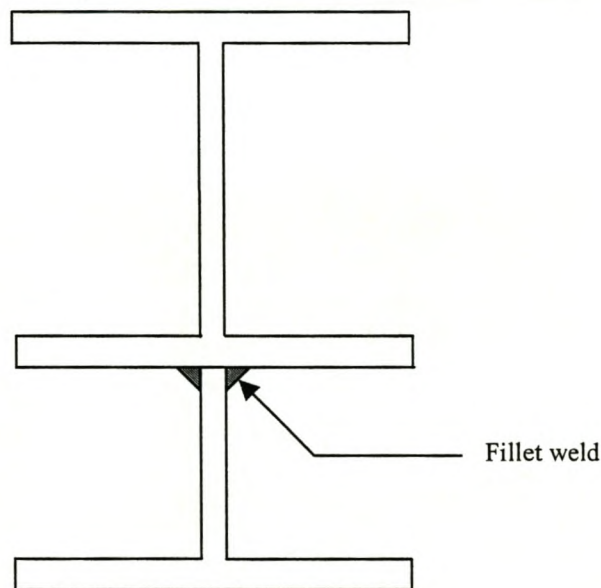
Weld mechanism forming a Pseudo-prismatic section
